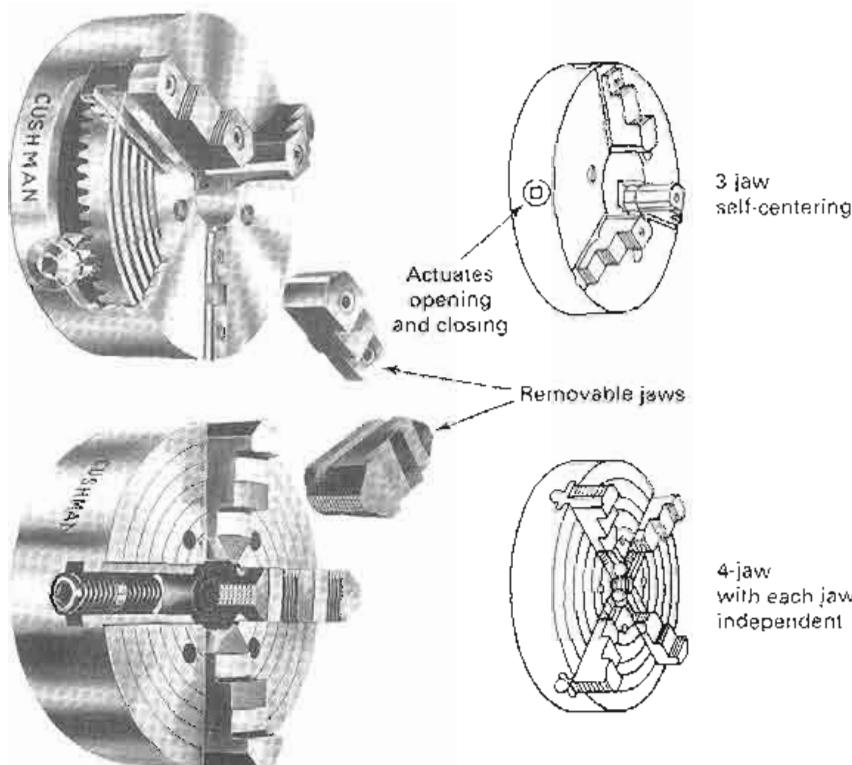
The jaws on chucks for lathes (four-jaw independent or three-jaw self-centering) can be removed and reversed.
